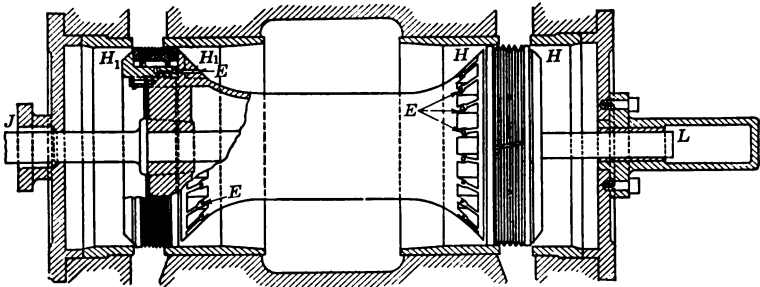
"SEMI-PLUG" PISTON VALVE
